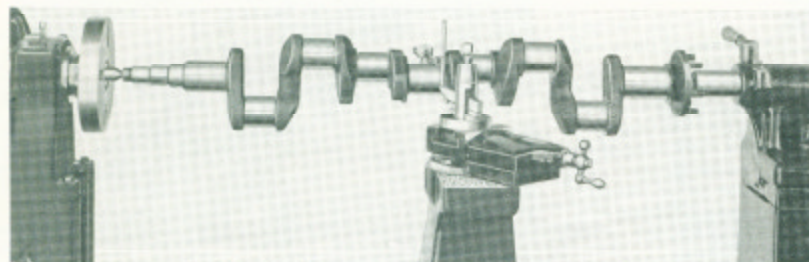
Testing crankshaft which is mounted between centers on the Brake Drum Lathe. The test dial button rests on the center bearing of the crankshaft and shows exact amount of error.
